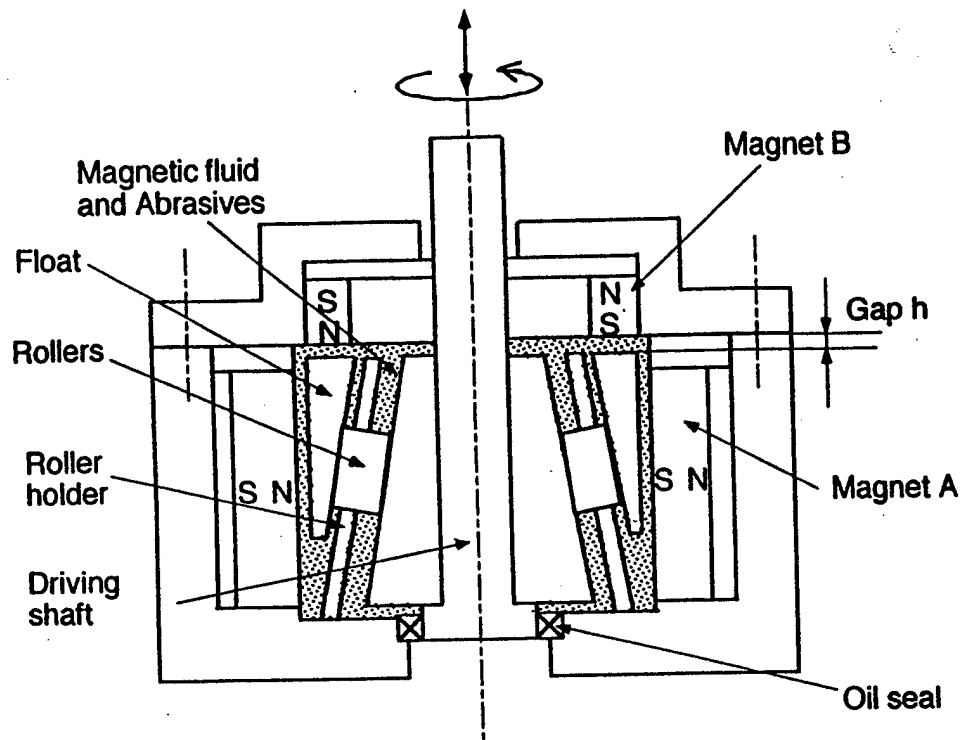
(b) Side sectional views of the magnetic fluid grinding apparatus used for finishing ceramic rollers
